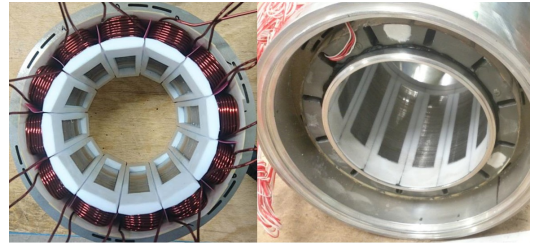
600 V machine before potting and frame mounting (non-drive end) of the left and after potting and mounting the frame on the right (non-drive end).
